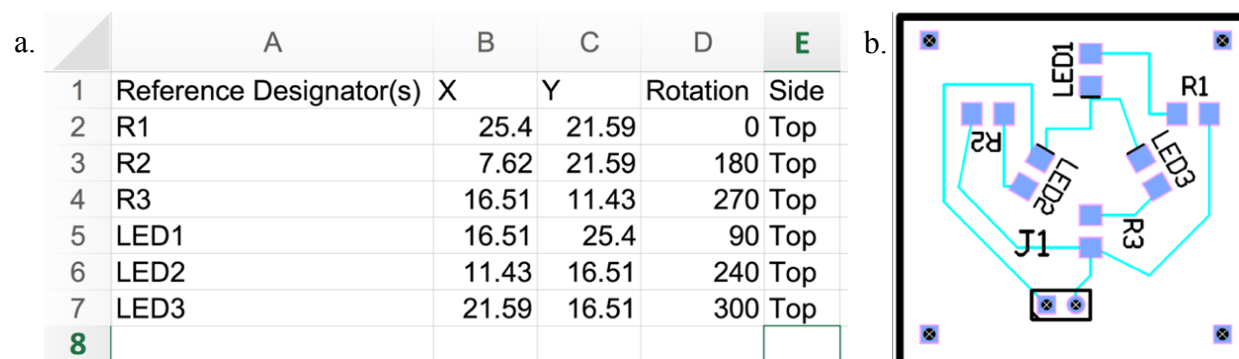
(a) View of Software generated Gerber file; (b) Sample PCB final layout.
